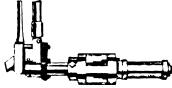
"IDEAL" SELF-FEED TUBE CUTTER
